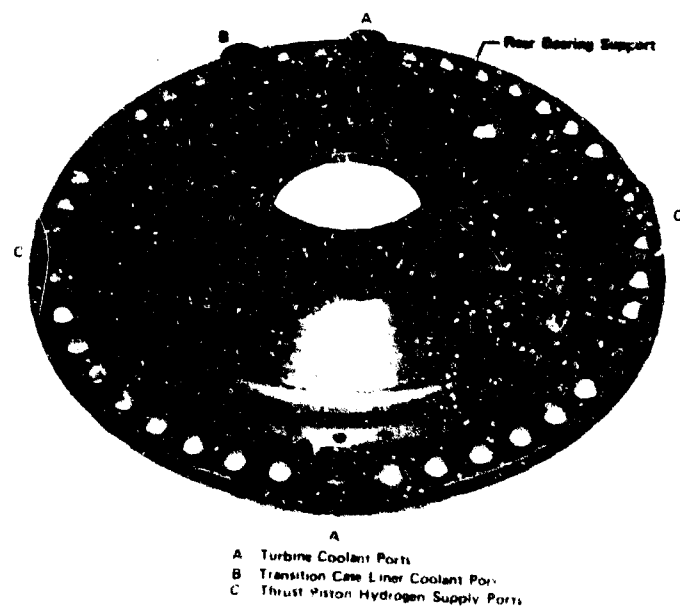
Rear Bearing Support - Turbine Side Up FD 38338A
